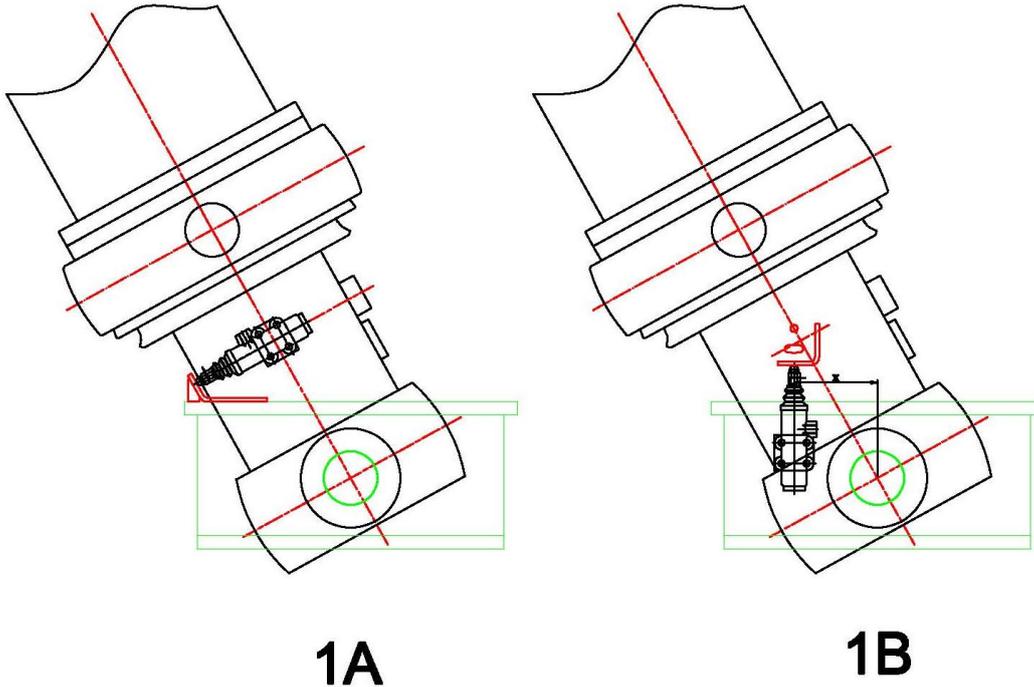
B - Bracket installation, the limit valve is installed behind or on the side of the cylinder, and the bracket rotates with the inclination of the cylinder.
